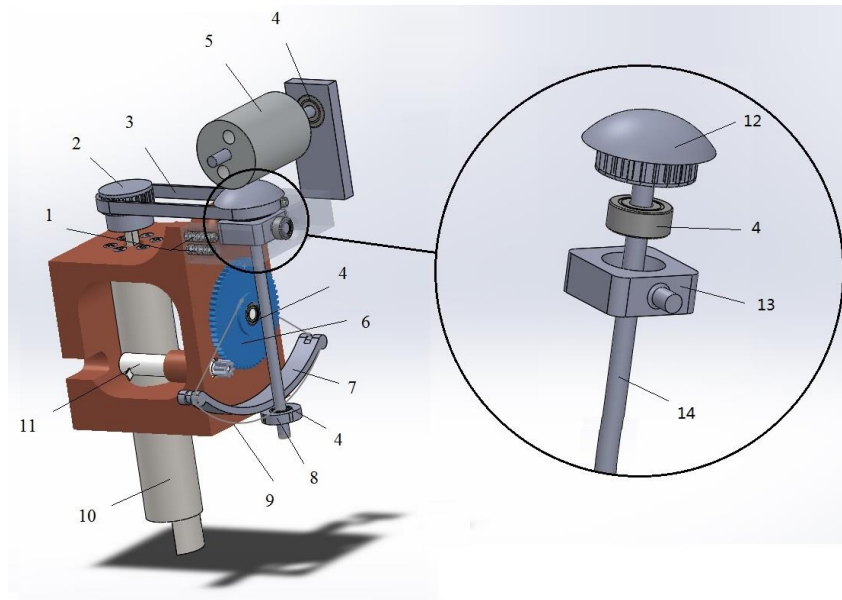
Configuration of the second-generation MMS. 1. Machine screw, 2. pulley, 3. timing belt, 4. ball bearings, 5. frictional cylinder with embedded linear bearings, 6. gear set, 7. arc guide rail, 8. shaft carriage, 9. nonstretchable cable, 10. BLDC motor, 11. miniature BLDC motor, 12. hemispherical frictional disc, 13. Disc support, and 14. steel shaft.
